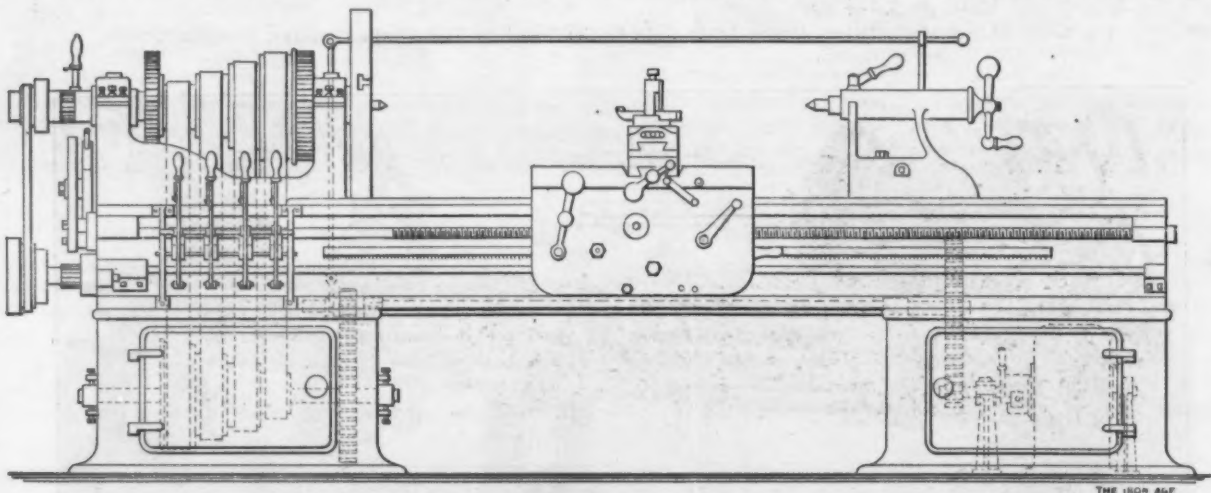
Westinghouse Induction Motor Driving a 24-Inch Engine Lathe Equipped with the Craft's System of Drive.
